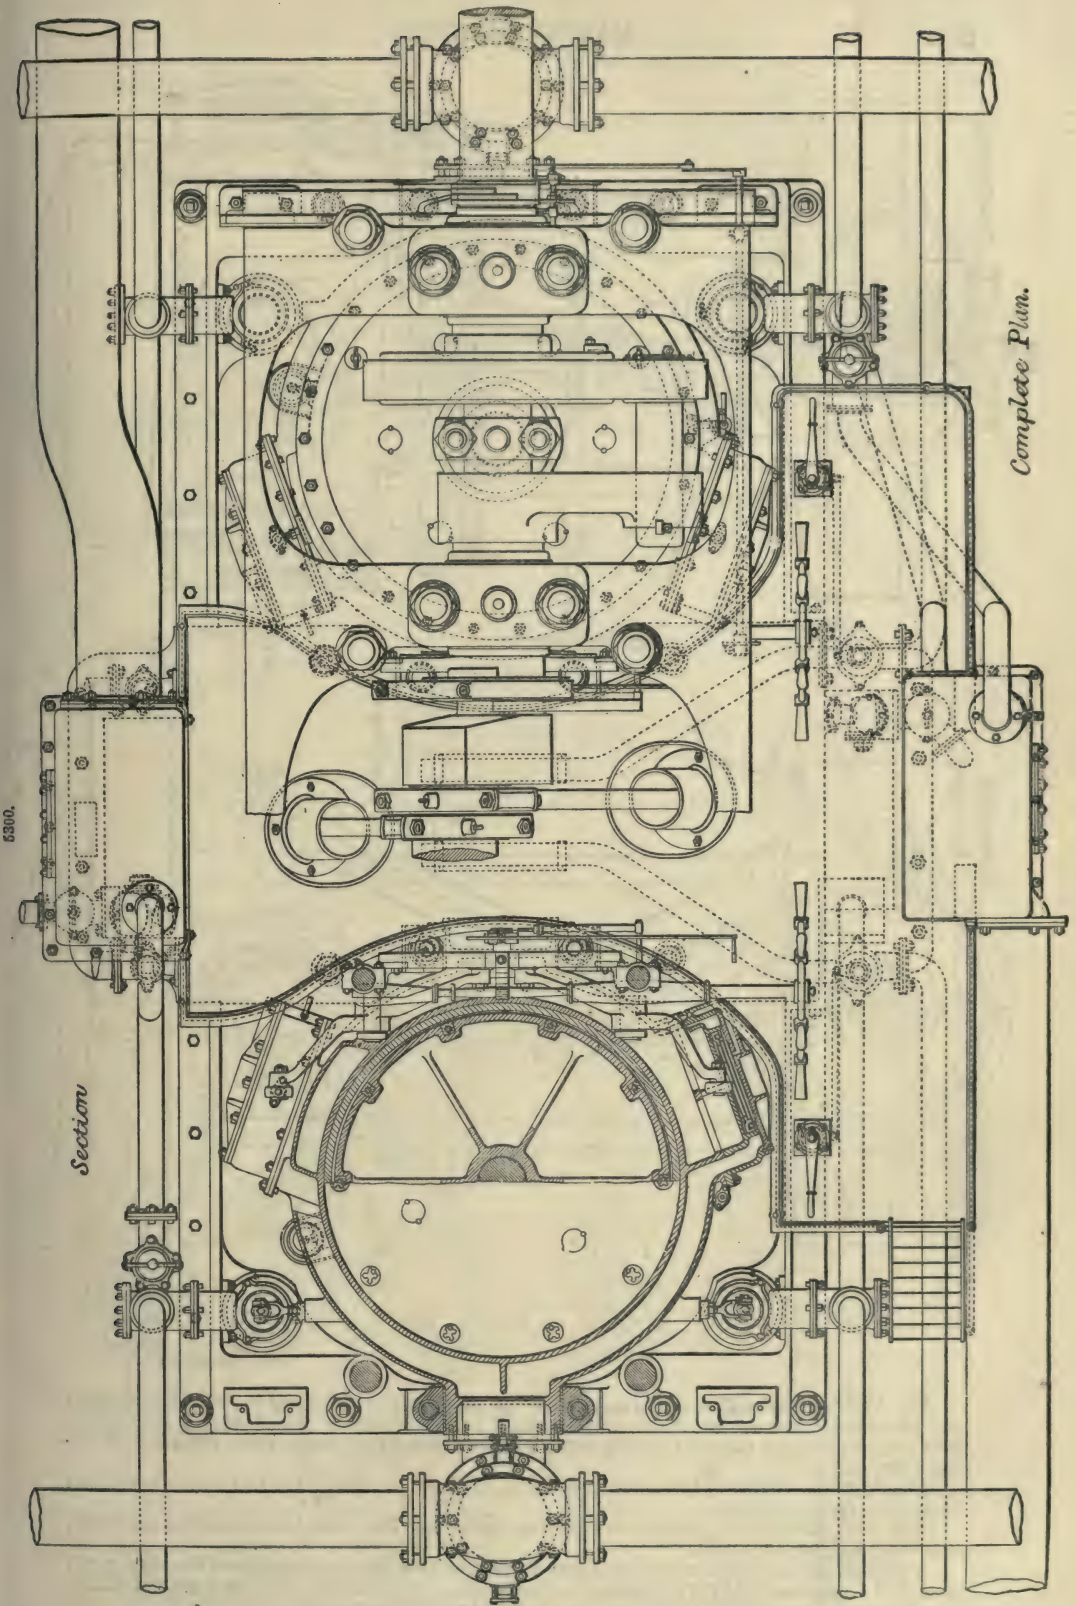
illustrates the arrangement of the air-pumps and condenser in sectional and complete views, also showing the connecting rods in a similar manner.
